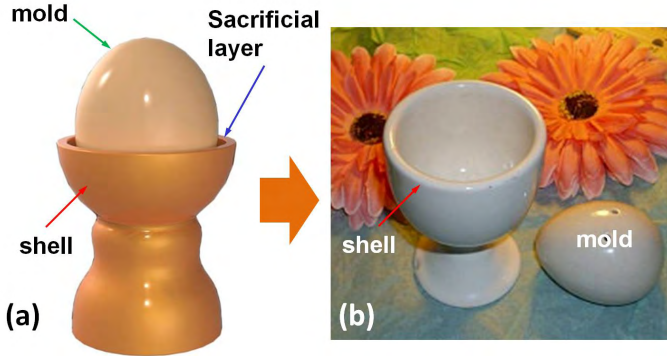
Illustration of the poached-egg molding concept. A spherical mold is coated with a shell and release layer. After immobilization, the shell top is removed and the mold is released.
